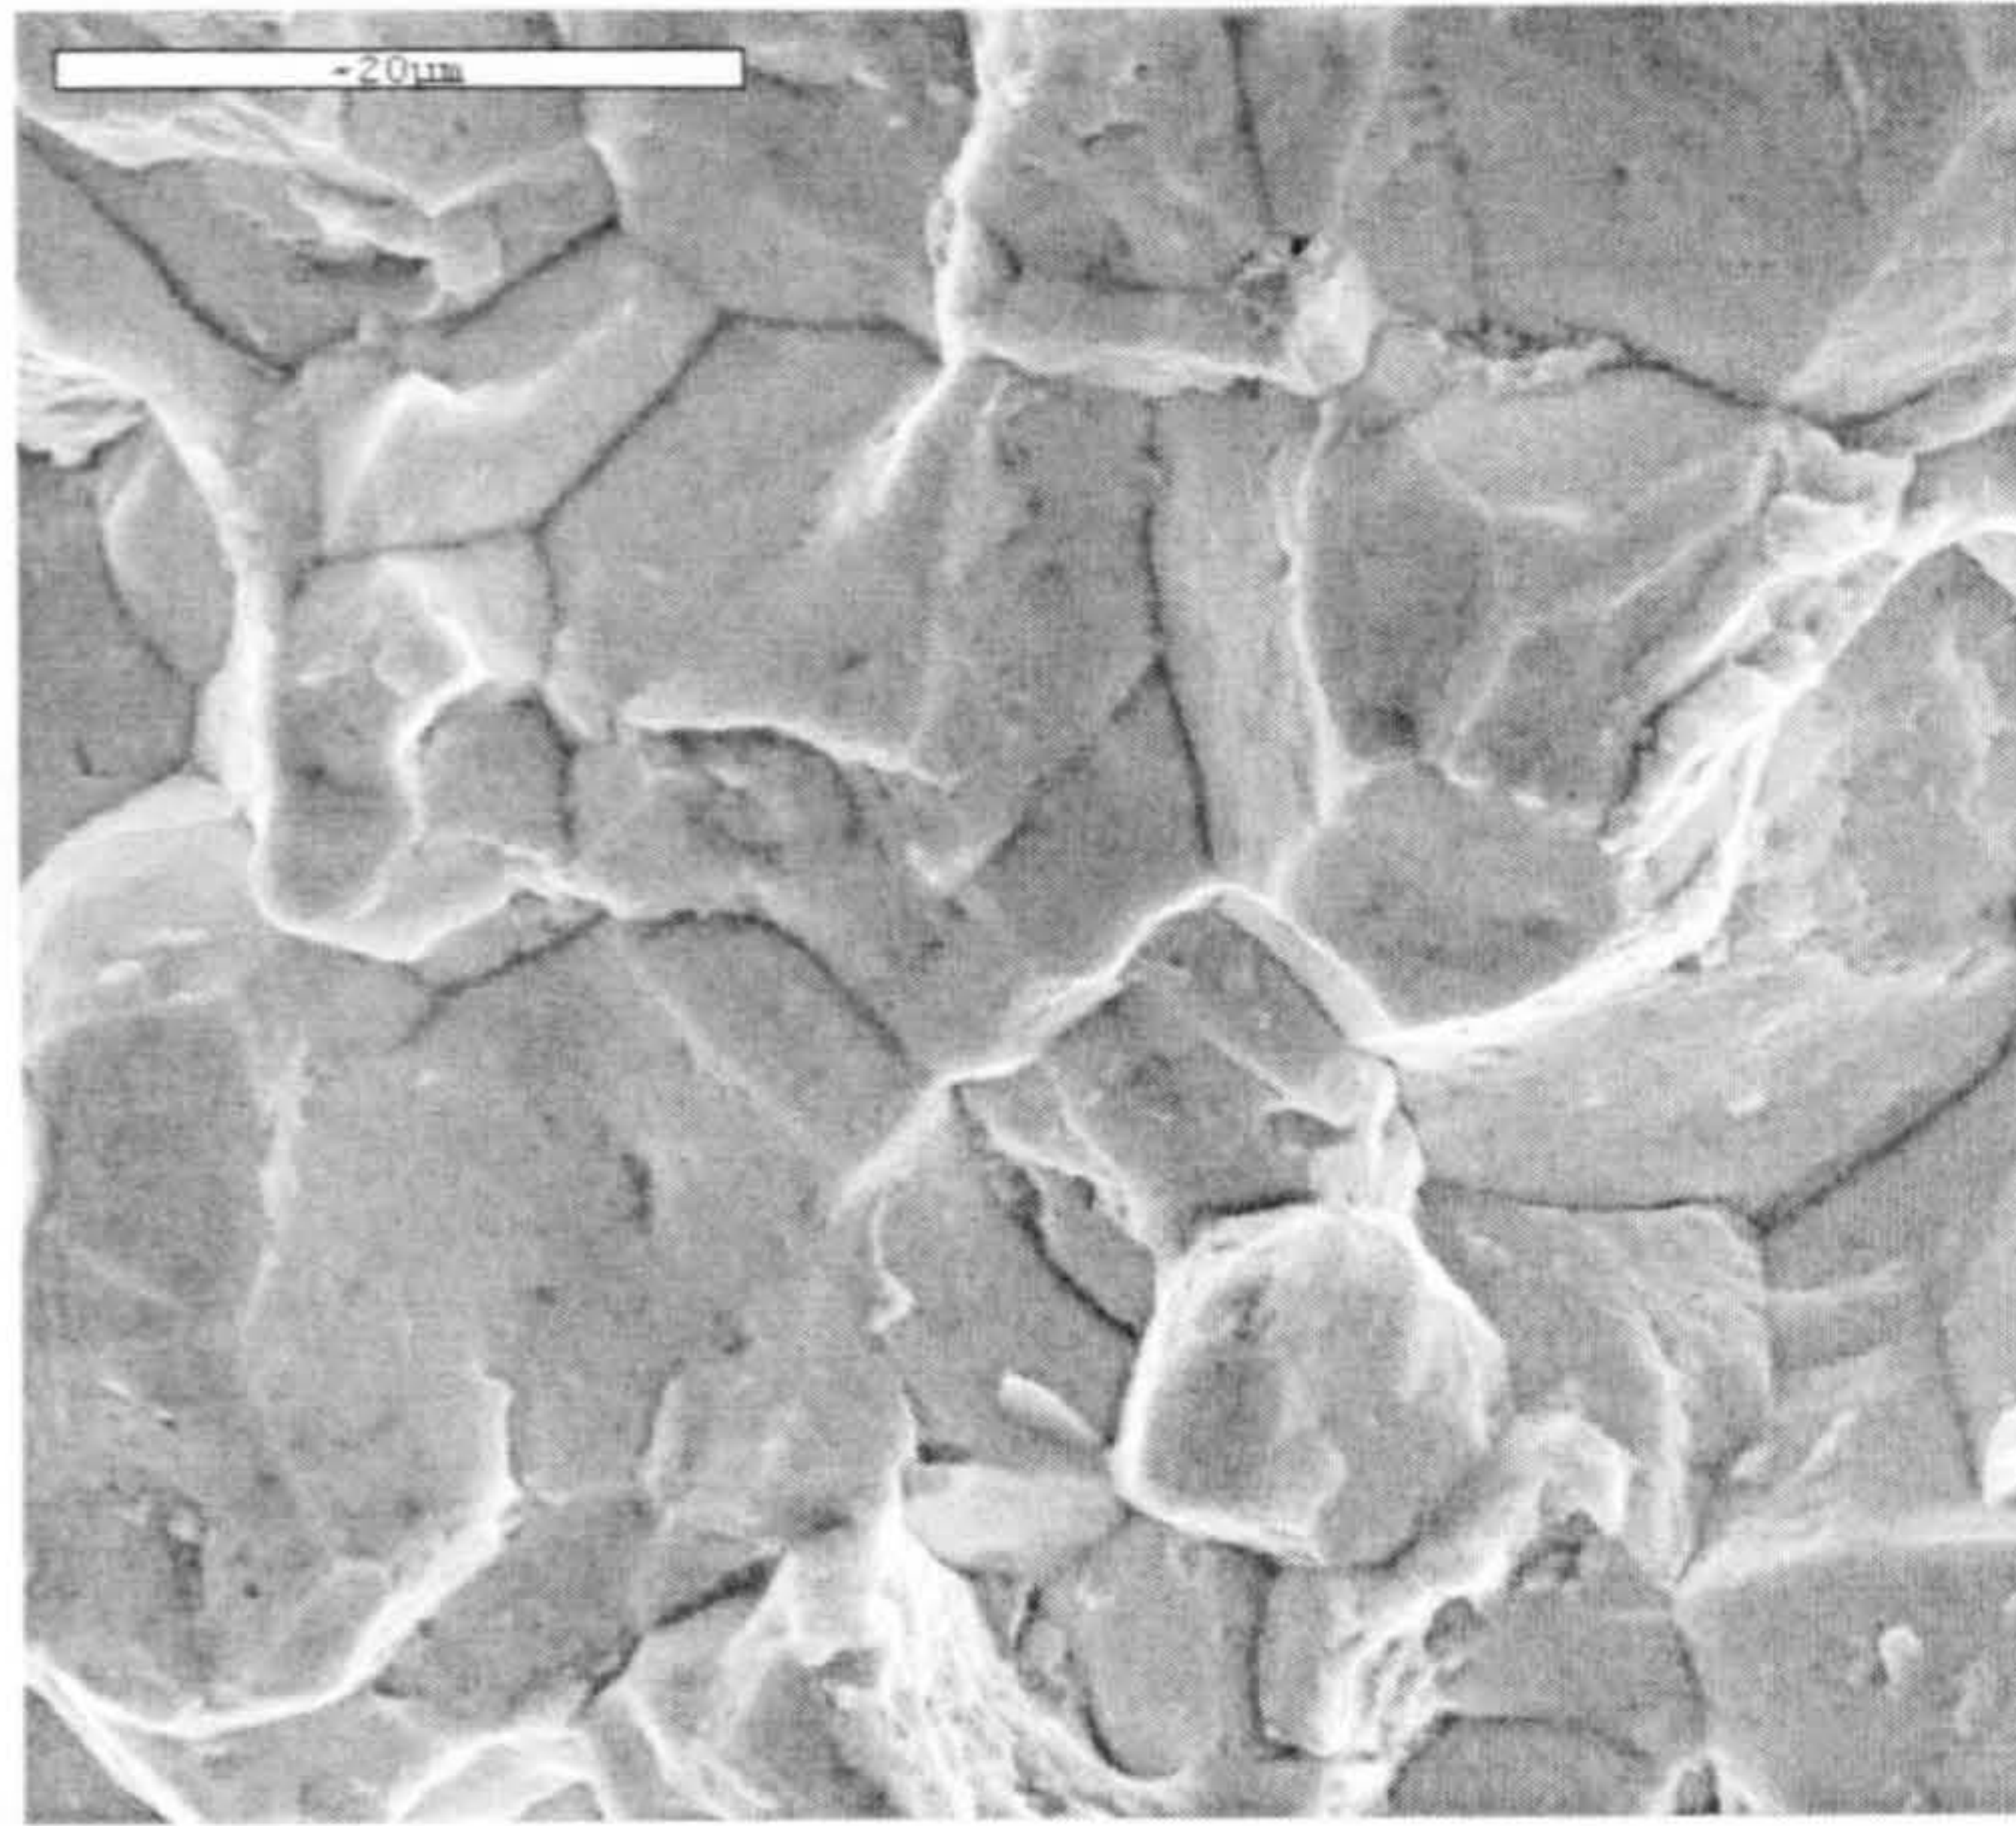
(c) SEM fracture surface of a specimen tempered at 160°C for 1 hr. Similar to previous figure but different location on fracture surface
